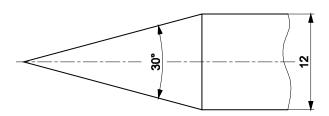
Probe Ø 12 mm (0/+0,1 mm)
